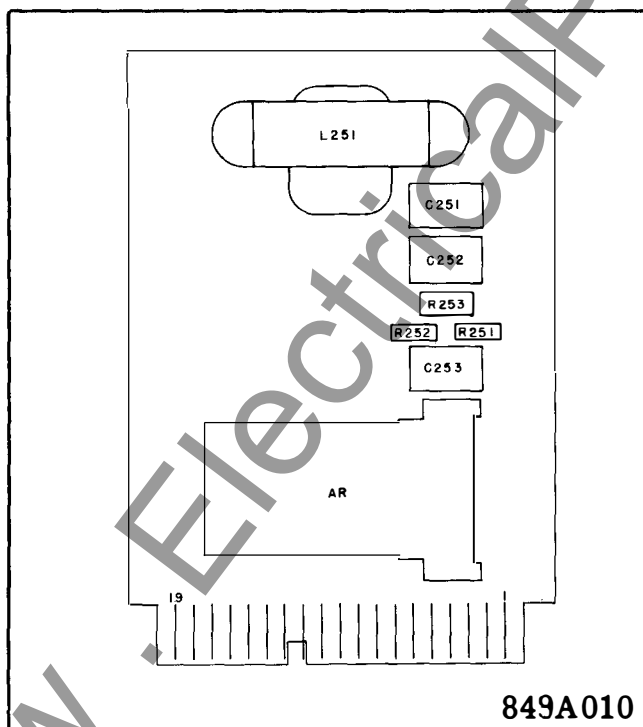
Component Location on Relay Printed Circuit Board with an AR Output for Type SKBU Relay
